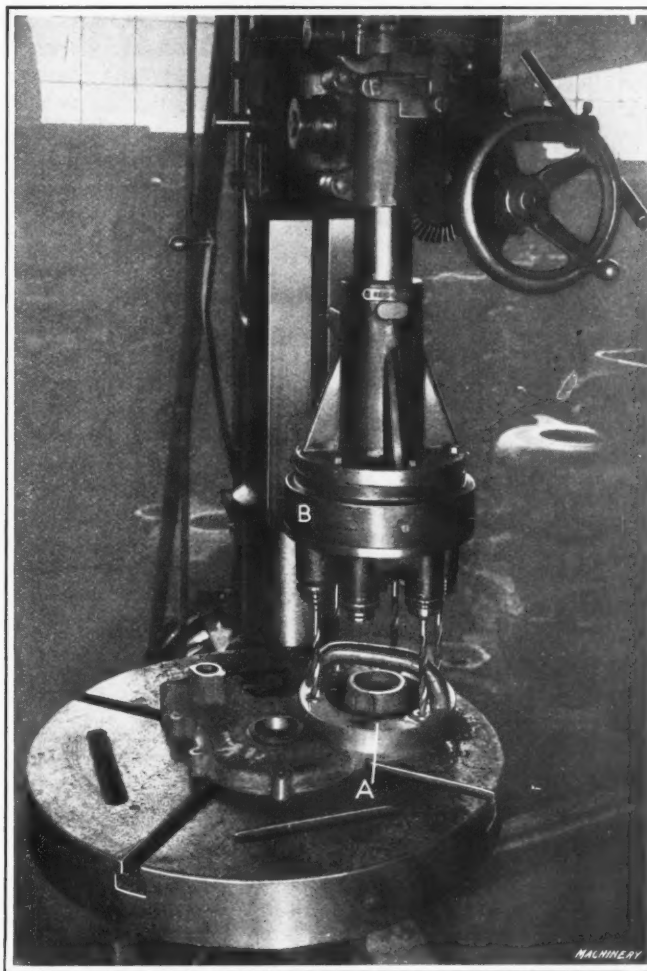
Cincinnati 24-inch Upright Drill and Sellow Six-spindle Drill Head for drilling Five Holes in Front Crankshaft Bearing on Timing Gear-cases
